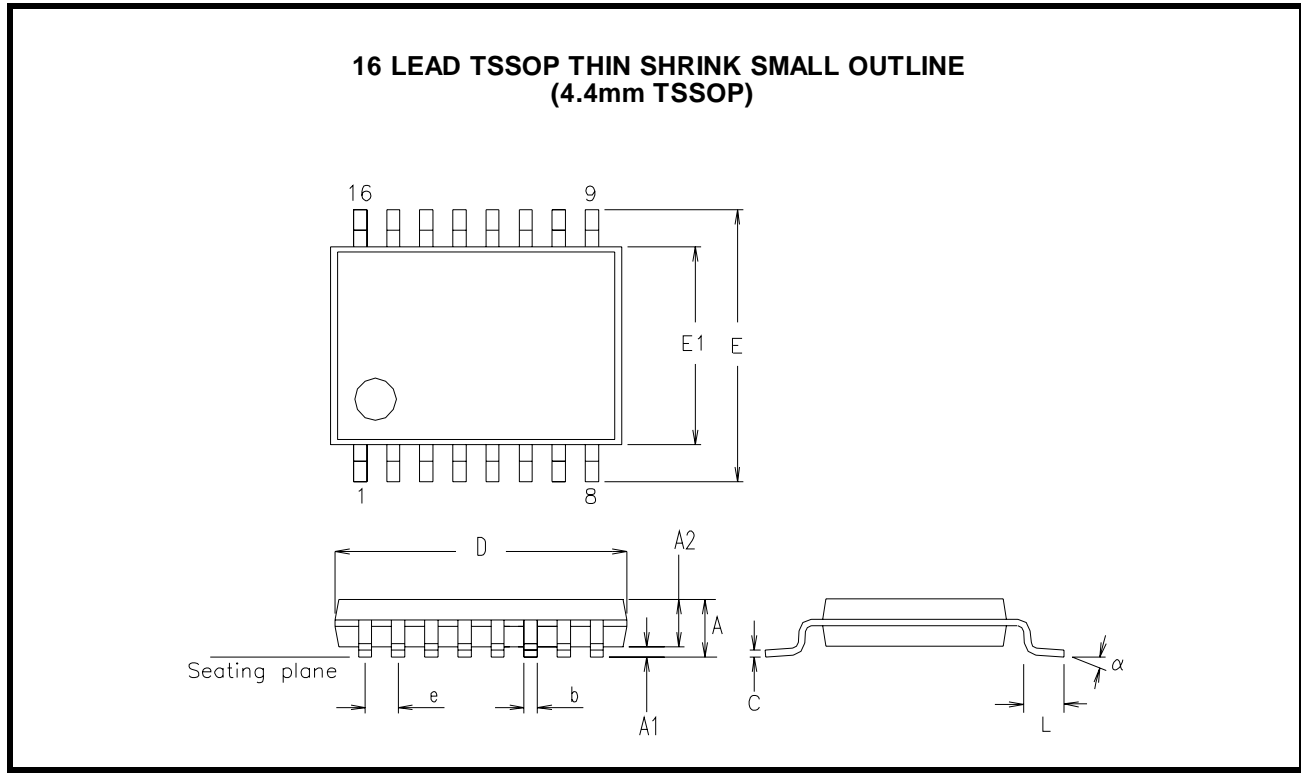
XRK32309 PACKAGE DRAWING - 16 LEAD SMALL OUTLINE
